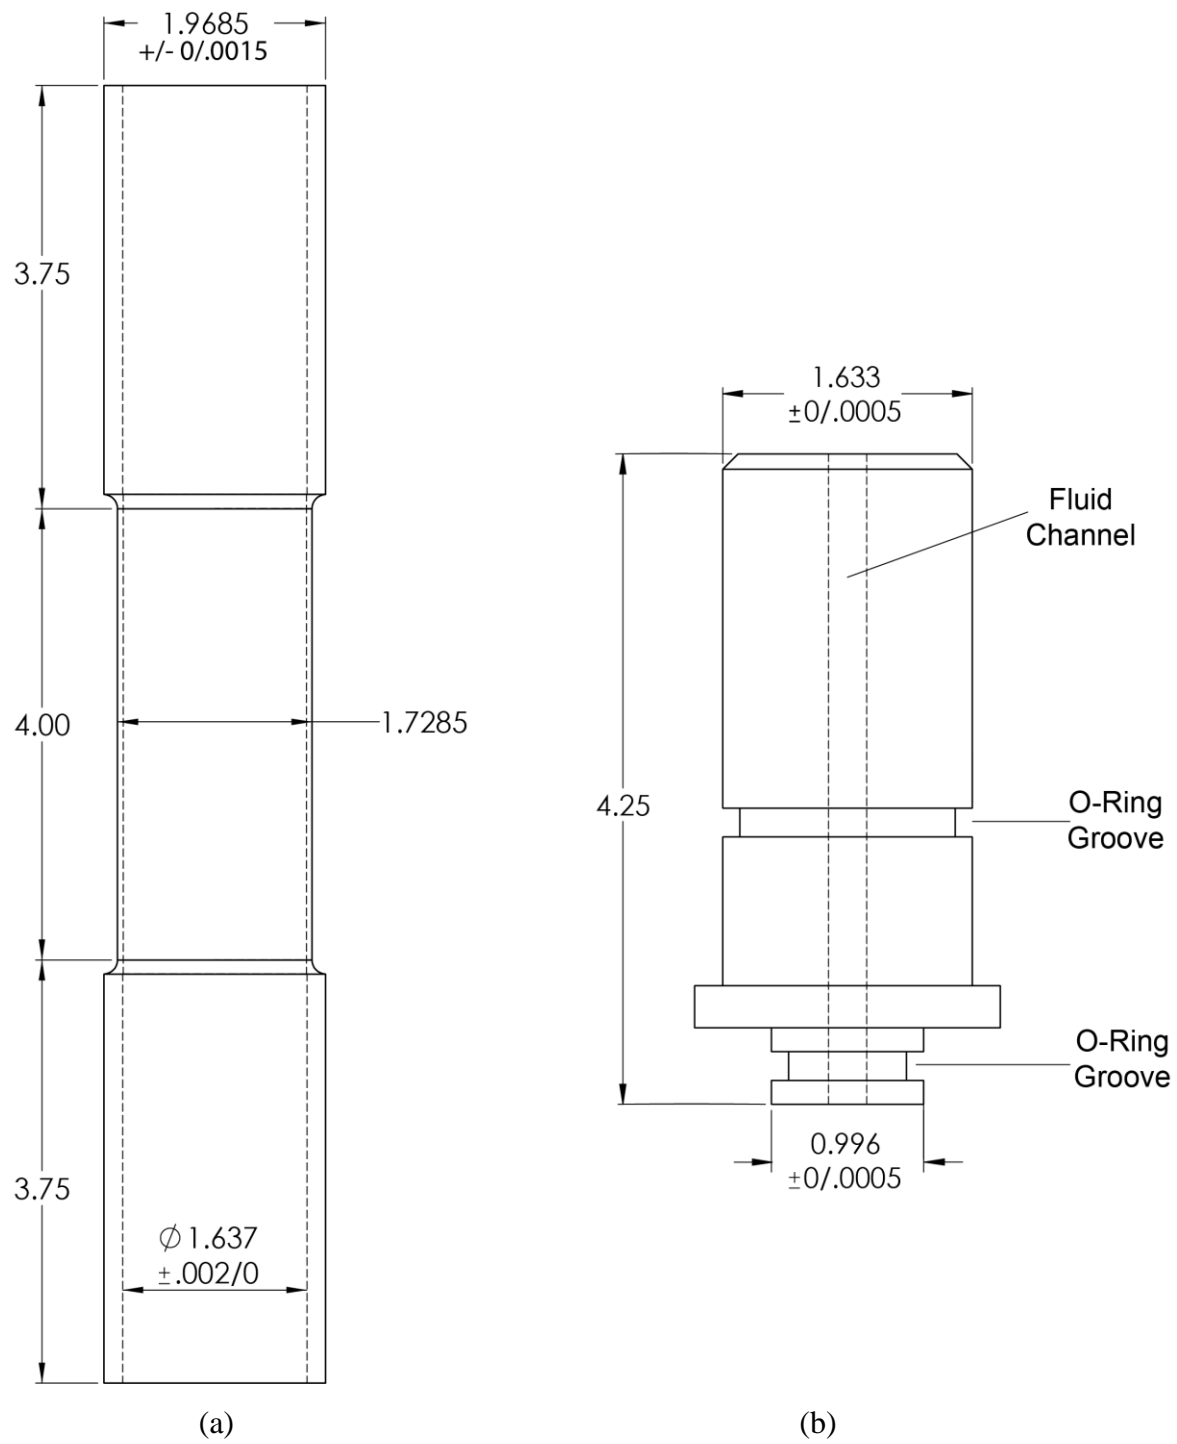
(a) Pressure-tension tube drawing. (b) Plug drawing.
